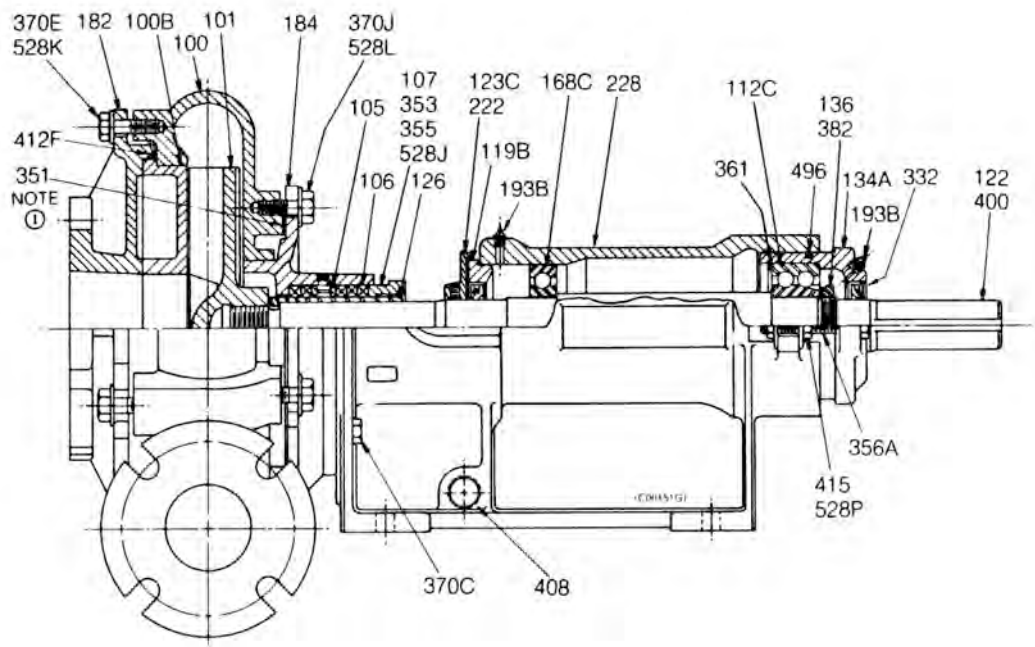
Model JC Sectional Assembly - all sizes except 10x12-22, Grease Lube 1J, 2J, 3J, 4J Bearings
